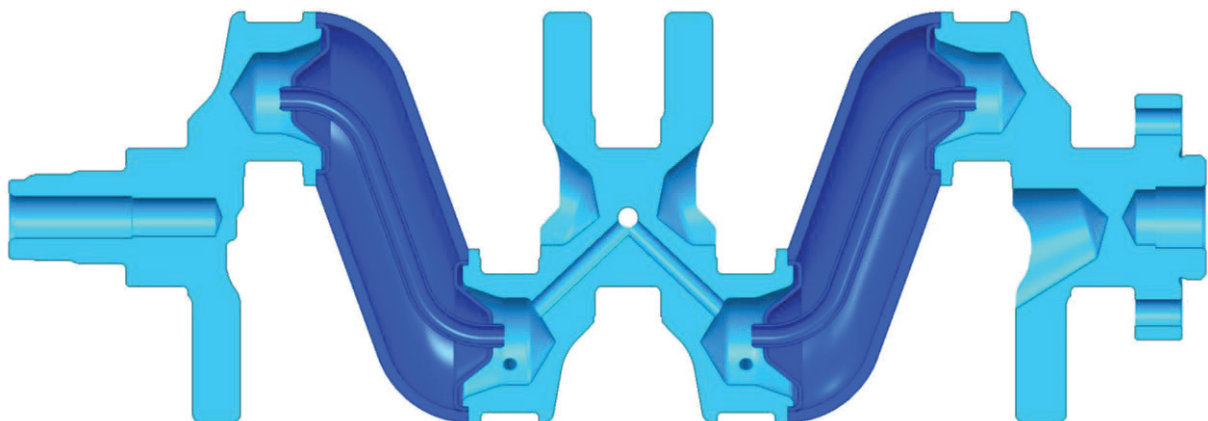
Longitudinal section of the 3-main-bearing crankshaft
